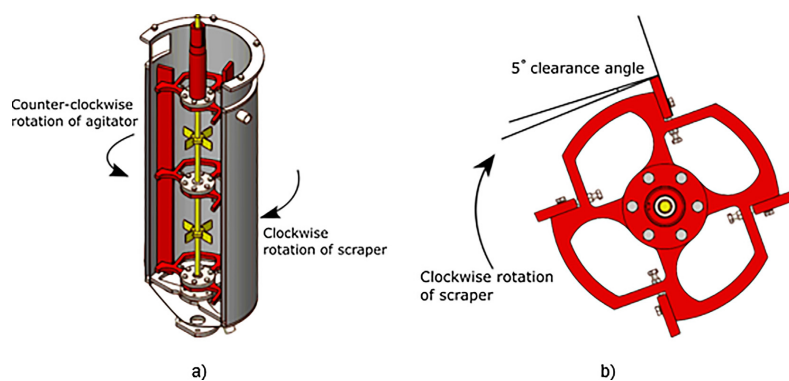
Section view of the reactor; (a) the configuration of the scraper and the agitator, (b) the scraper-agitator sub-assembly showing 5° clearance angle for the scraping blade.
